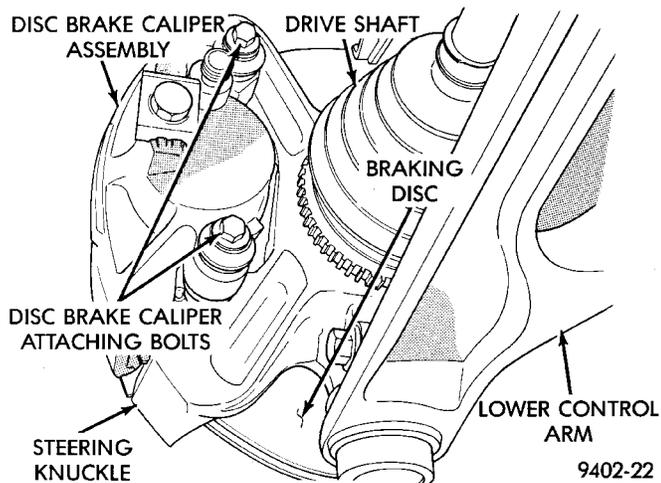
Front Disc Brake Caliper Assembly Bolts
